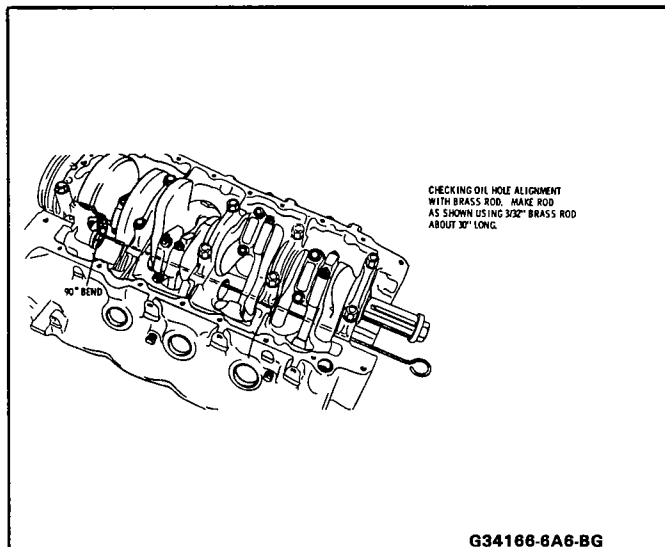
Checking Camshaft Bearing Oil Hole Alignment
